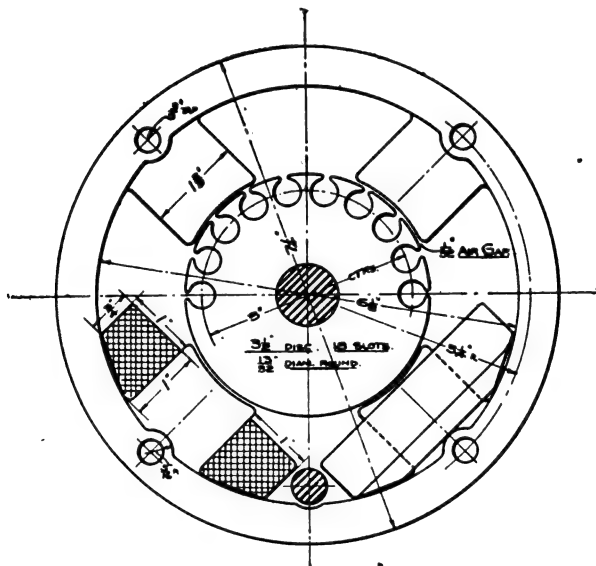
END ELEVATION OF FIELD AND ARMATURE.
